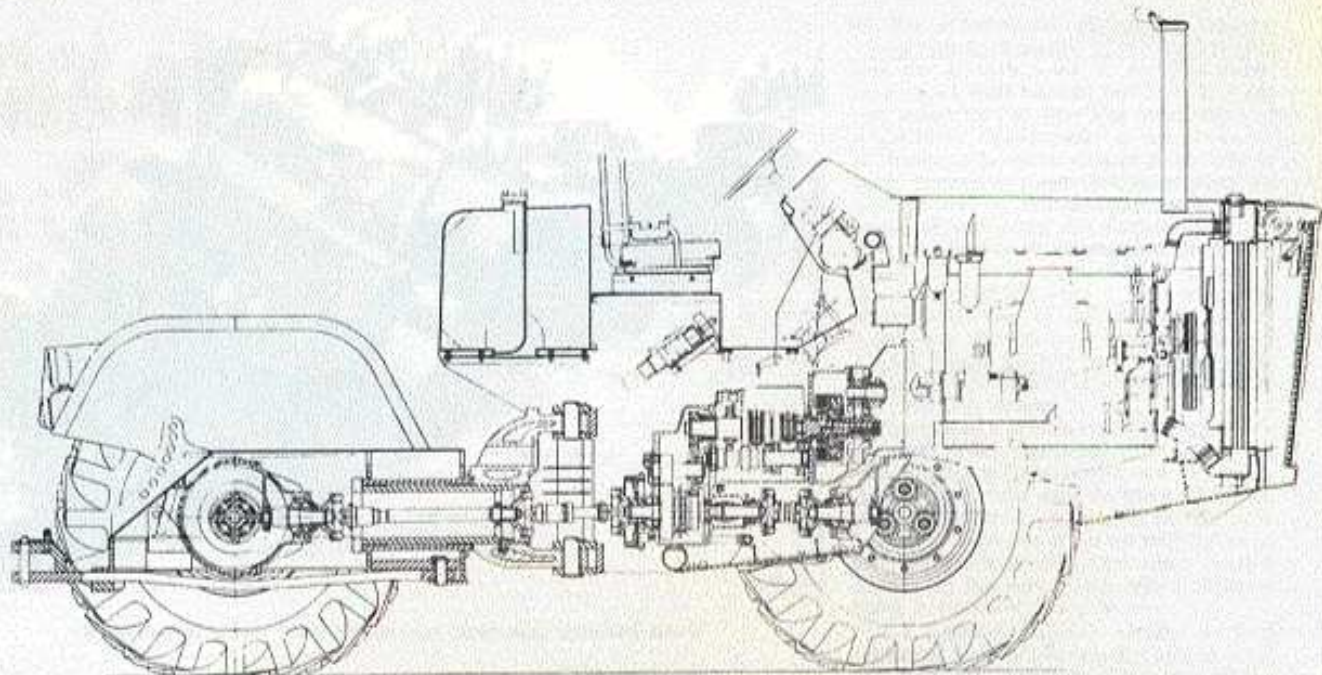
Sectional drawing of the John Deere 8010 four-wheel drive articulated agricultural tractor
